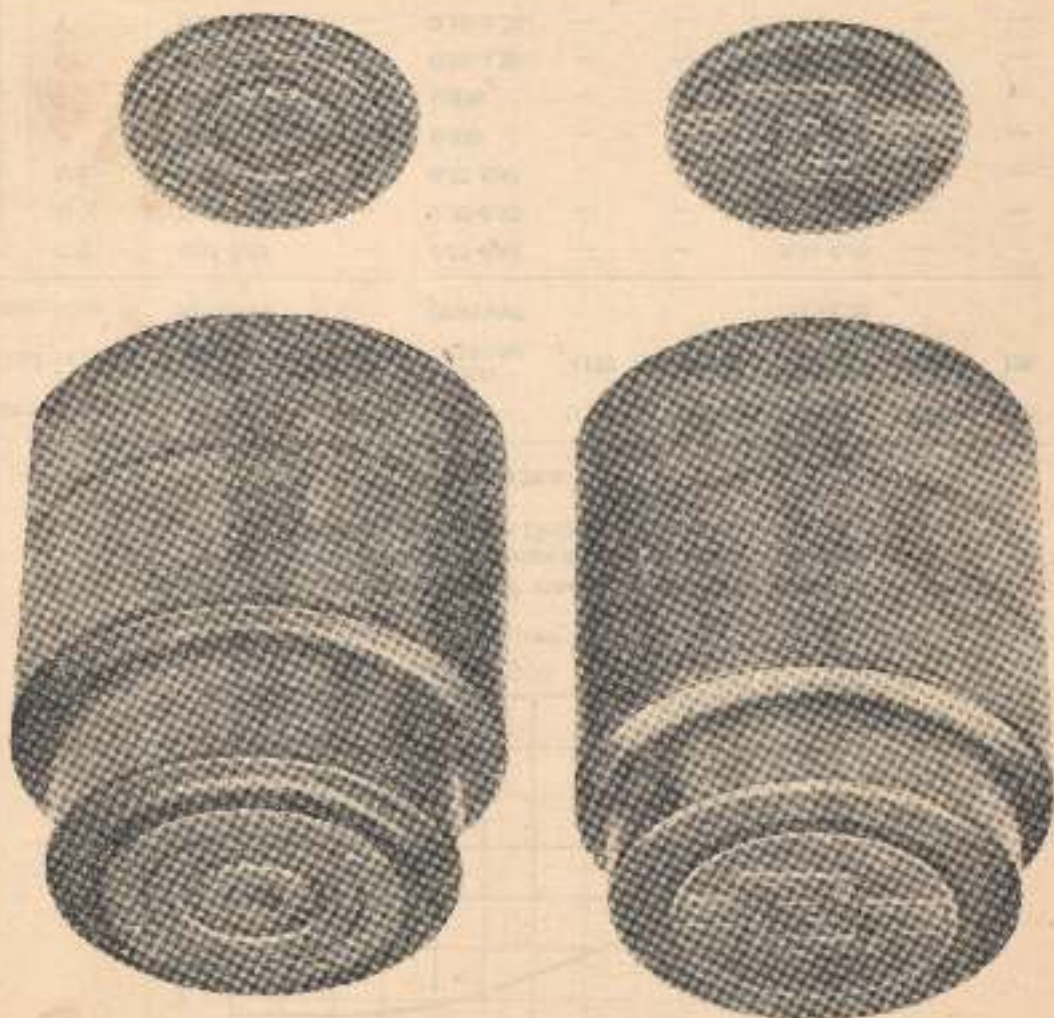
(a) Coin-stamping tool made from steel—DIN 50NiCr13 (Courtesy: VEW, Austria)
